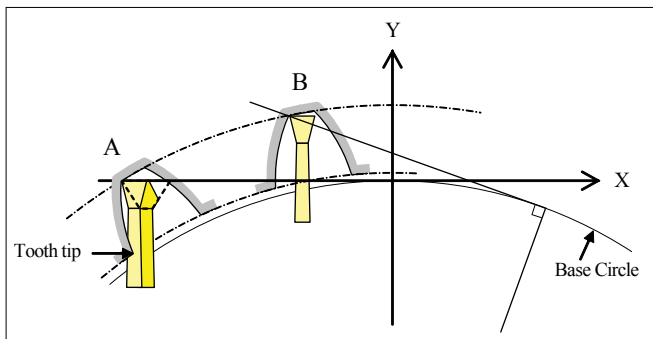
Measurement of inner gear by TDG-Method (A) and NDG-Method (B).
